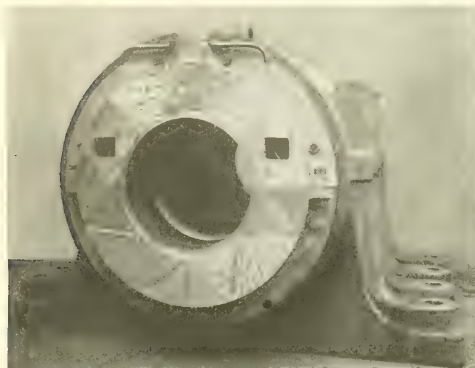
LARGE PEDESTAL BEARING EQUIPPED WITH END THRUST BEARING
